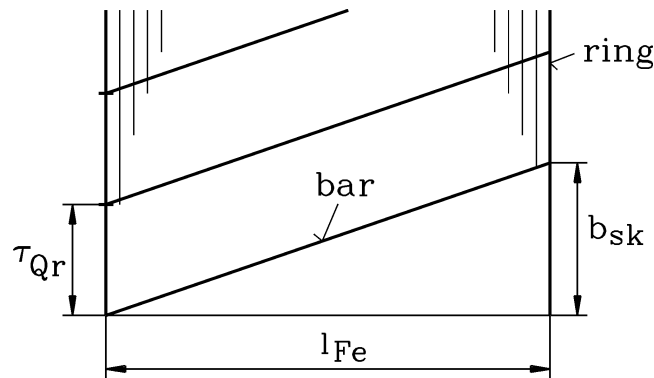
Skewed rotor bars of cage rotor
